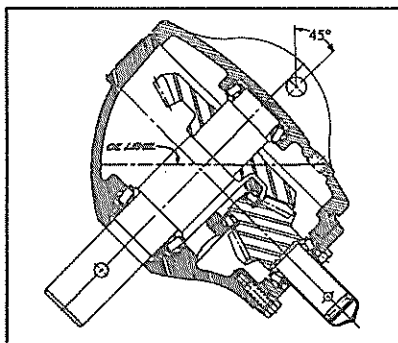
PIVOT GEARBOX 45° TO CHECK OIL LEVEL
